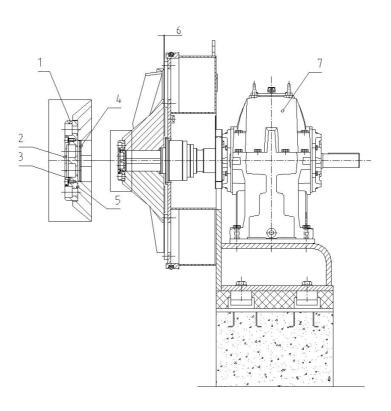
Adjusting the rotor clearance, gear drive (STOA016595)
